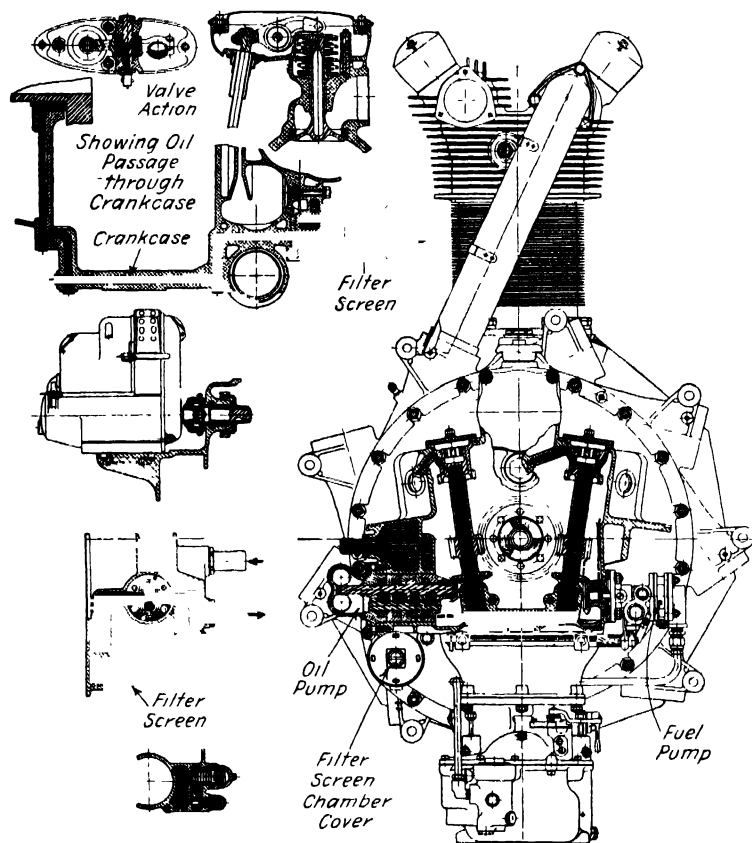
Part Sectional Views of Wright "Cyclone" Engine Parts Showing Lubrication System.
